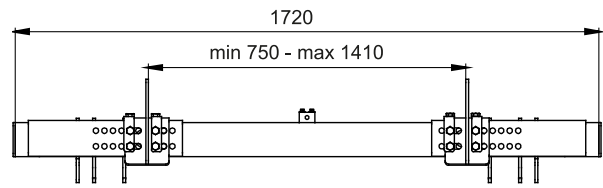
ZL-45-90, ZL-45-110, ZL-75-90, ZL-75-110
